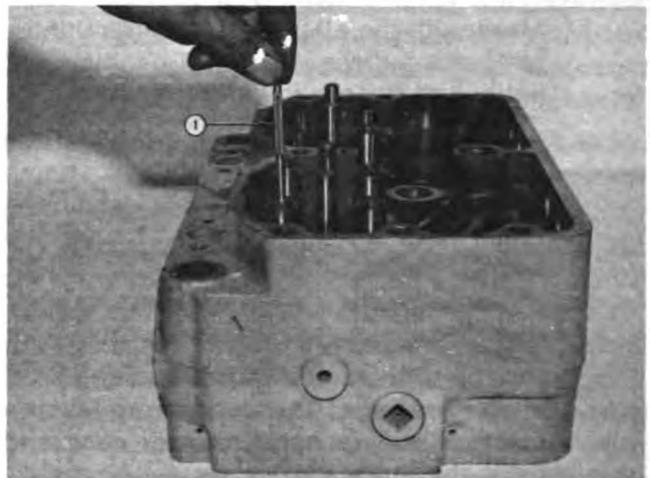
(N10212). Measure The Bore Of The Valve Guide.
